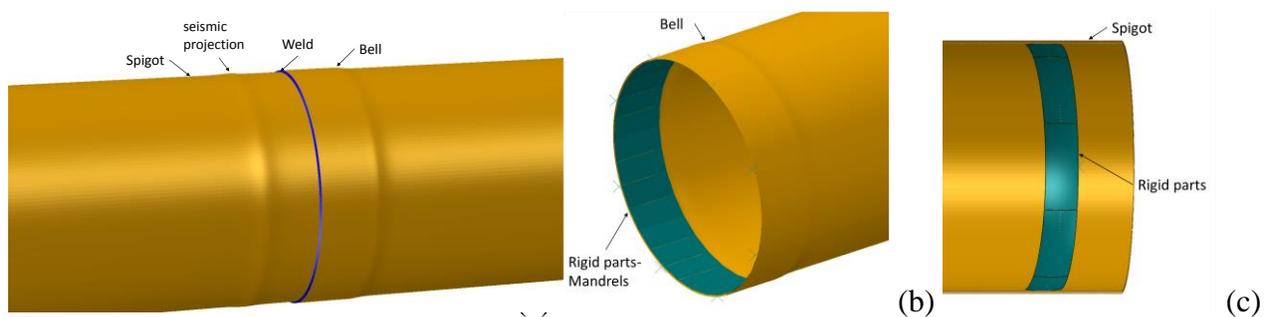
Finite element model of the welded lap joint; geometry of the double-welded area of the joint.
